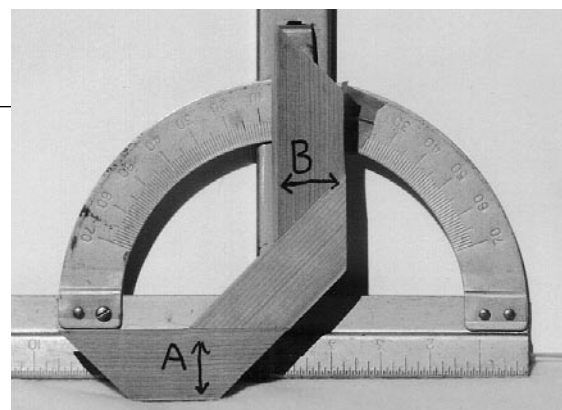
To verify your setup, cut and assemble three segment pieces and test for square.
